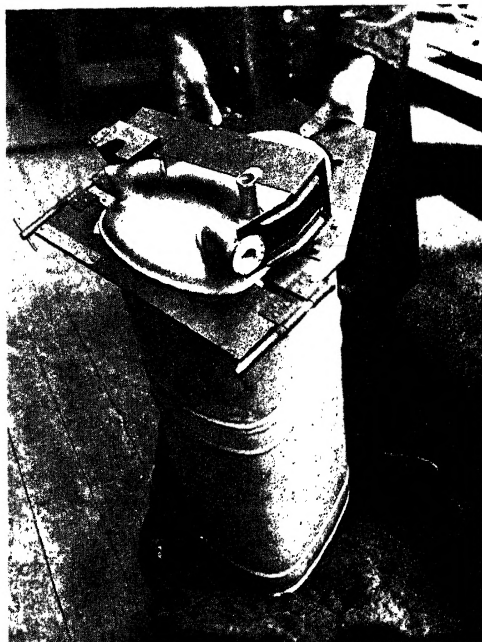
ASSEMBLY OF TANK IN JIG READY FOR TACKING WITH WELD.
